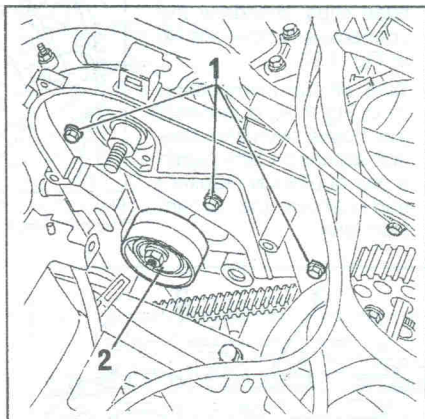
The three screws (1) and the tensioning roller (2) for the timing belt must be removed before the cylinder head can be taken off.
